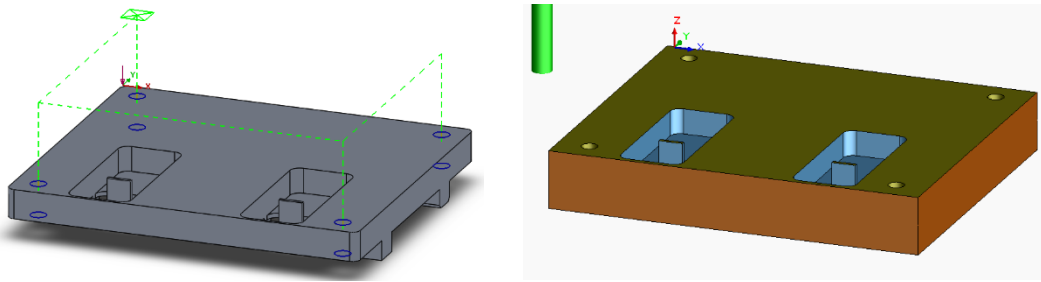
Machining mount holes for mount plate (a) Tool path (b) Machined result
